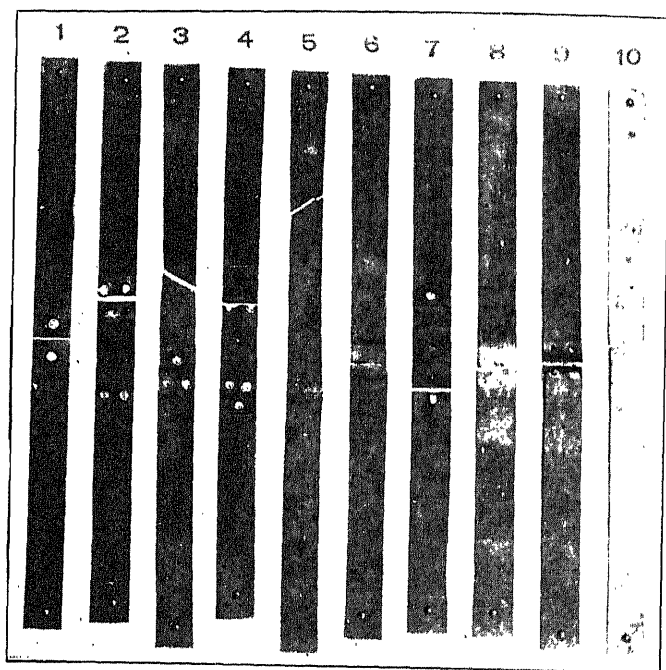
Spot-Welding Tests on Hoop Iron.
